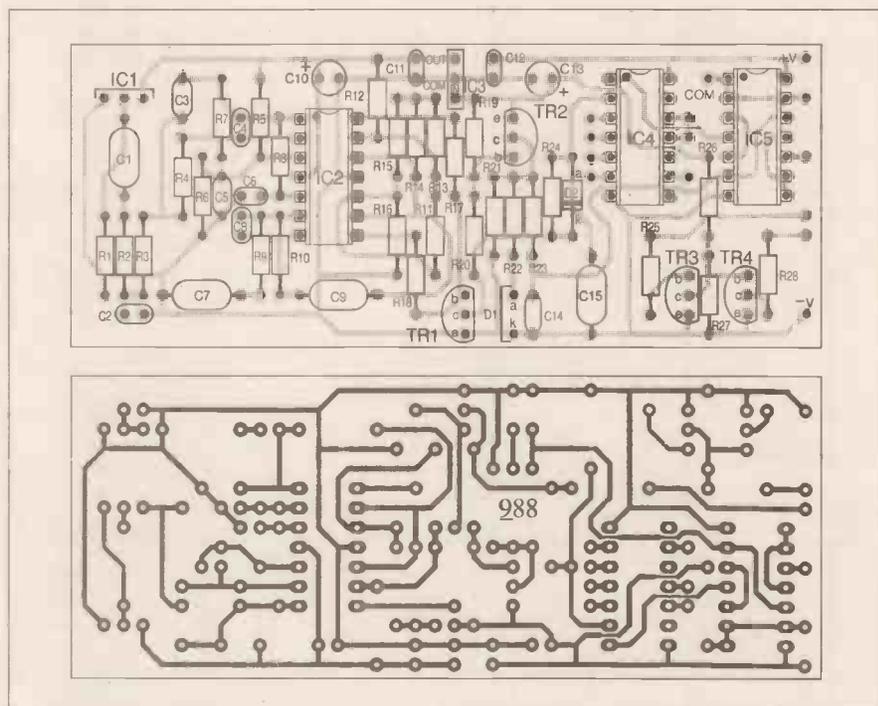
Sensor printed circuit board component layout and actual size underside copper foil master pattern.
